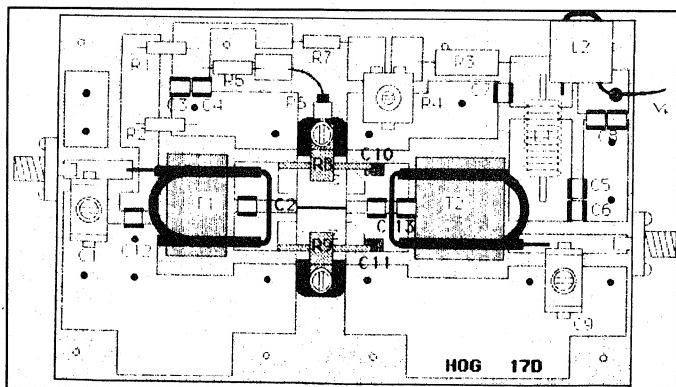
The component layout diagram. The only critical component locations are those of C2 and C13. They must be soldered in place (1/2 of C13) before the mounting of the input-output transformers.
